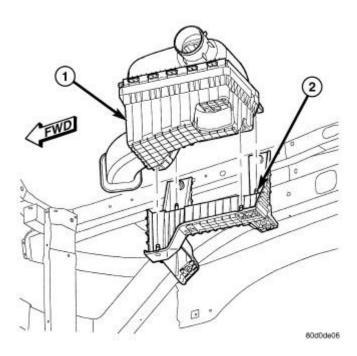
Removing/Installing Air Cleaner Housing Courtesy of CHRYSLER LLC
